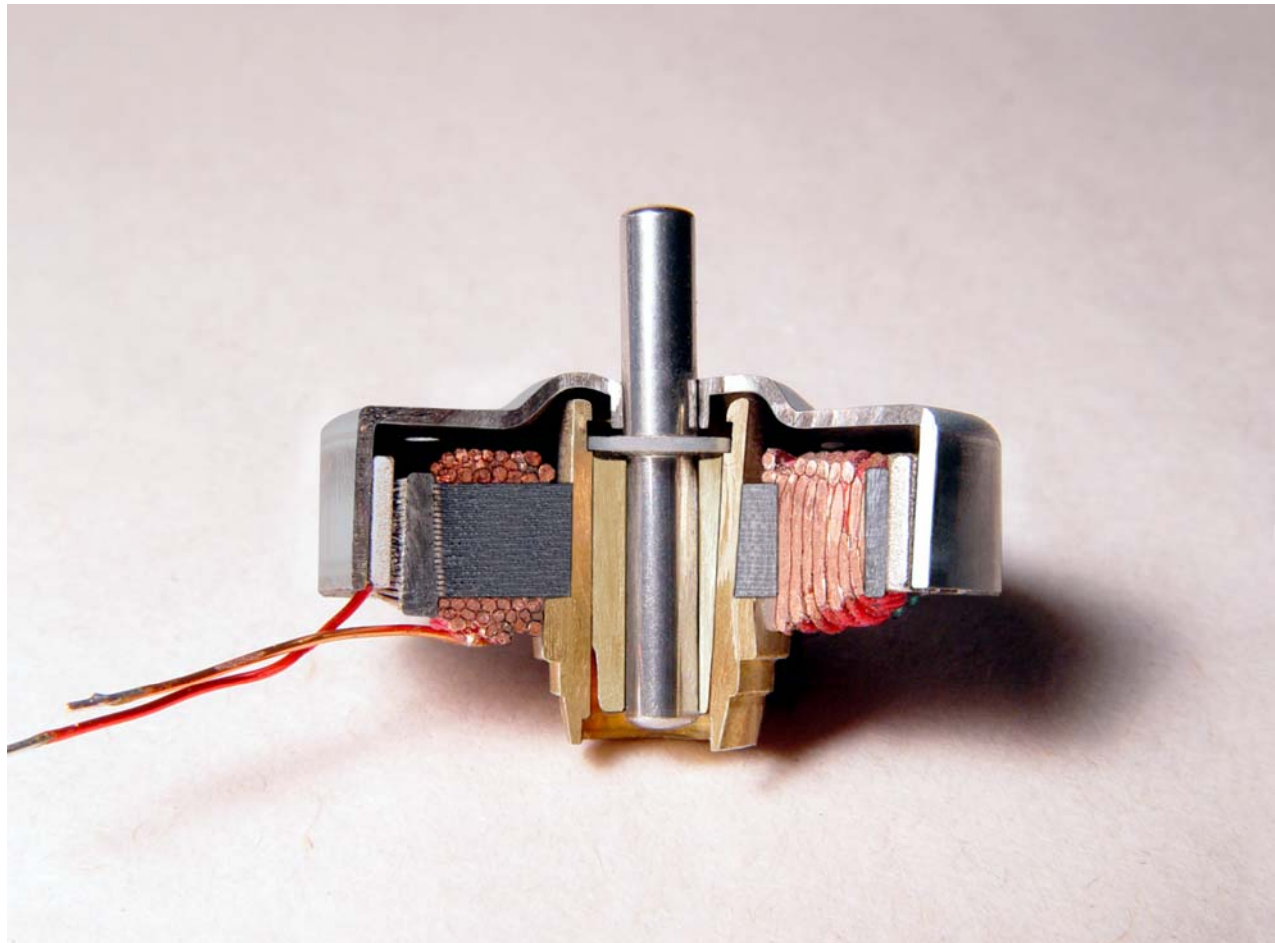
A cut away of a completed stock GBL motor. Special thanks to Eric Tolladay for enhancing this image.
